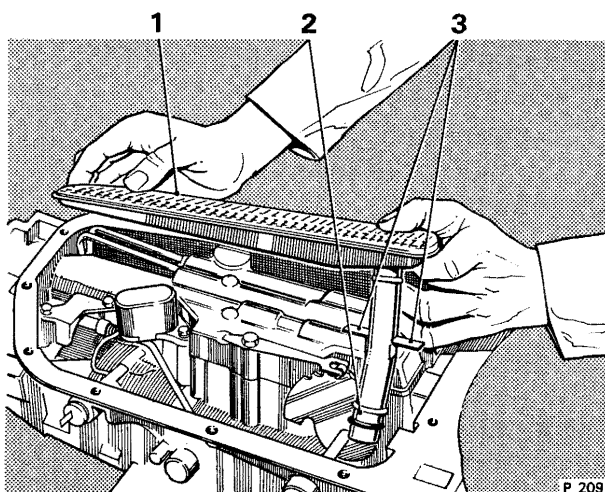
REMOVING INTAKE PIPE AND FILTER ASSEMBLY
